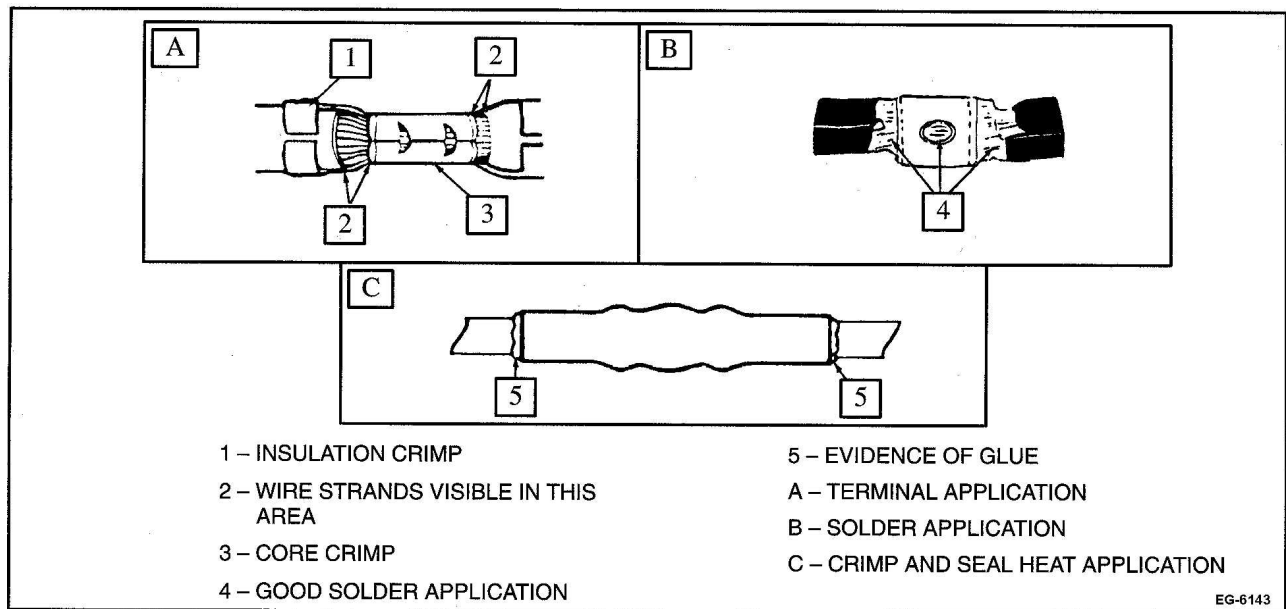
Inspecting Terminal, Solder, Crimp and Seal Heat Applications
